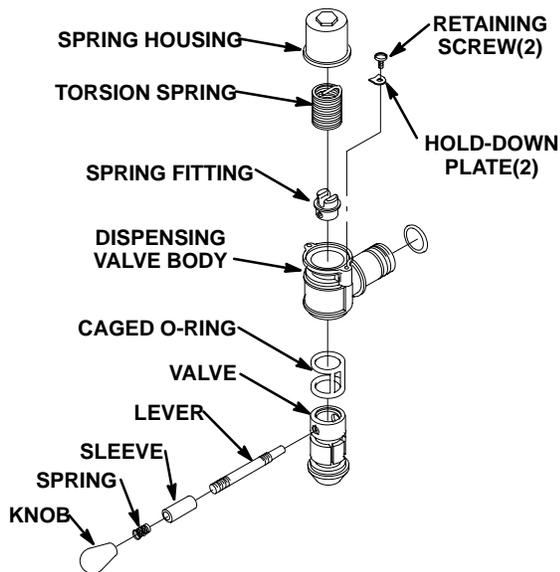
SELF-CLOSING DISPENSING VALVE
